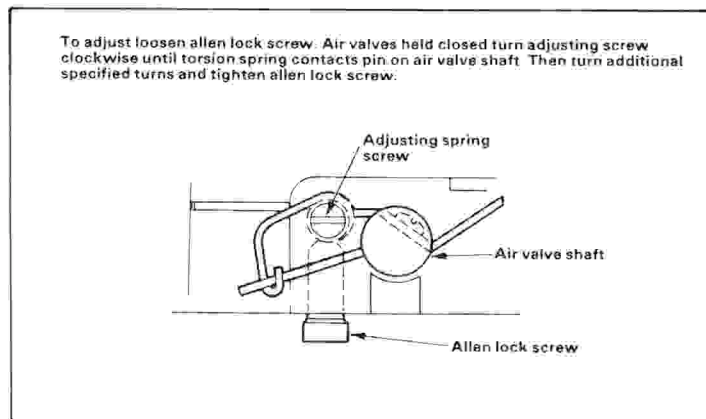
AIR VALVE SPRING ADJUSTMENT
